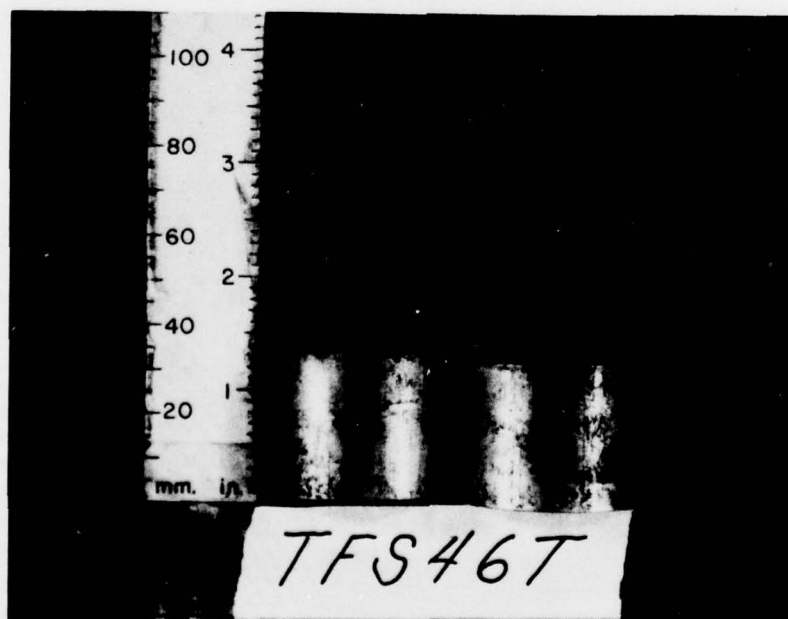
Tensile test at 0°C with a machine speed of 0.0423 cm/sec.
